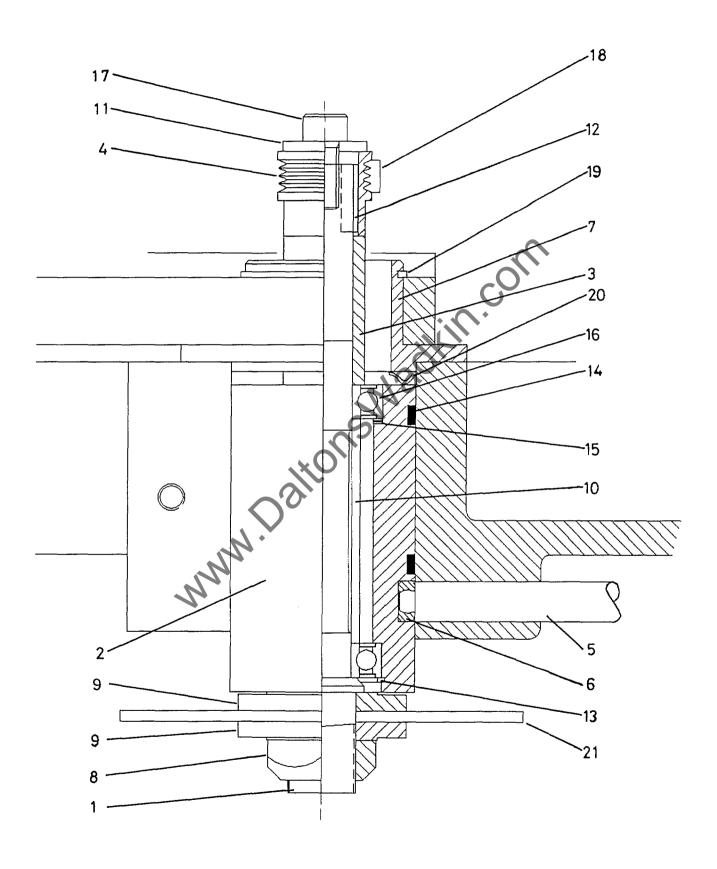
SCORING SAW - SPINDLE ASSEMBLY
